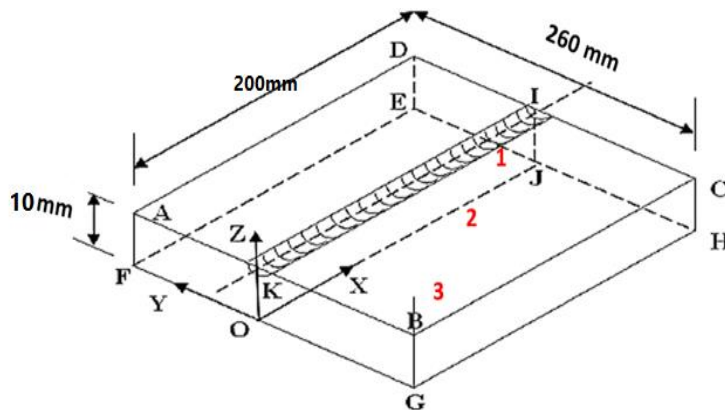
Dimensions of parts used in welding and simulation operations. Welding Starts from right to left
